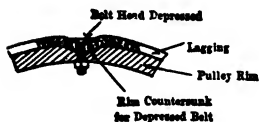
Countersinking Rim of Pulley for Lagging Bolts.
